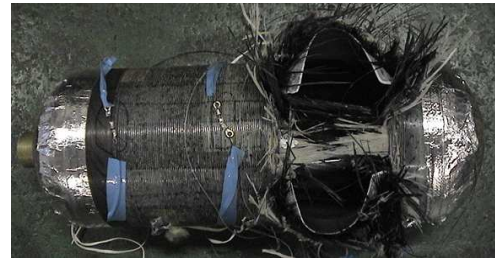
Specimen after Burst (Pitch1 and Pitch2(B))
